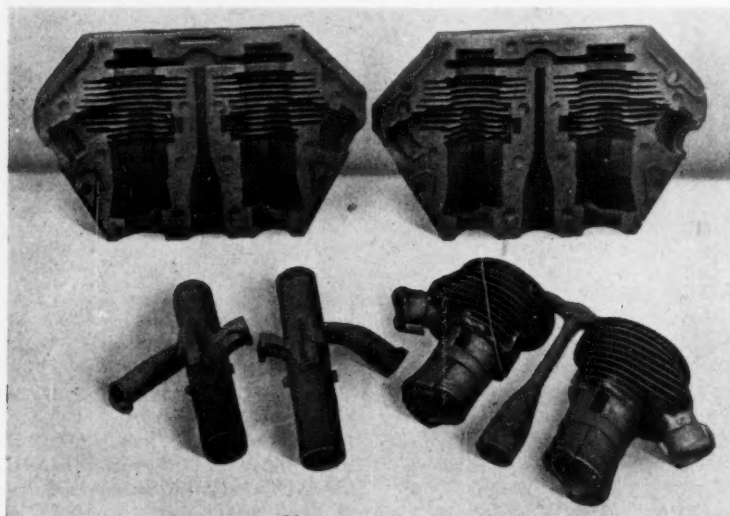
A Pair of Shell Moulds, Two Cores and a Spray of Castings Made with Similar Moulds and Cores. Castings for the 125- and 150-c.c. Engines are Made in the Same Moulds but with Cores of Different Diameter
